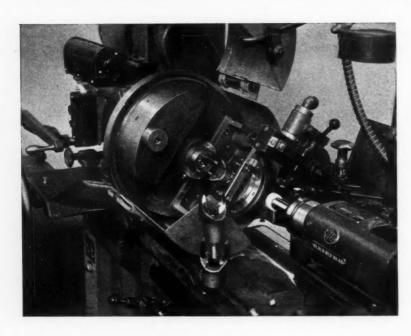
Special Indexing Fixture Used in Grinding the Bore and Two Faces of Universal Joints at One Set-up
